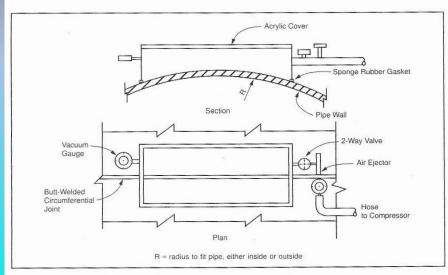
Look-box for vacuum testing of circumferential weld seams
